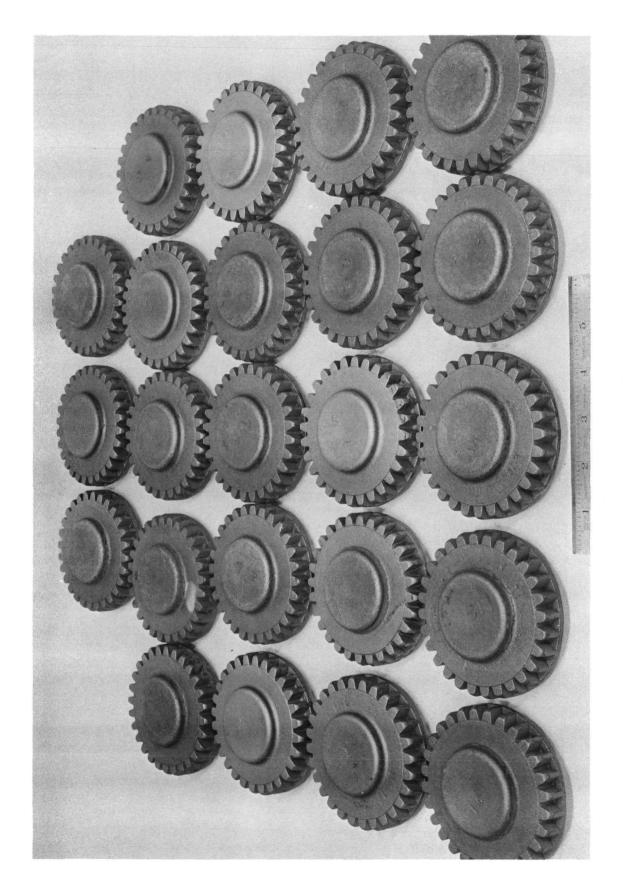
Parts Made During The "Production" Run of Standard Forged Gear Blanks
